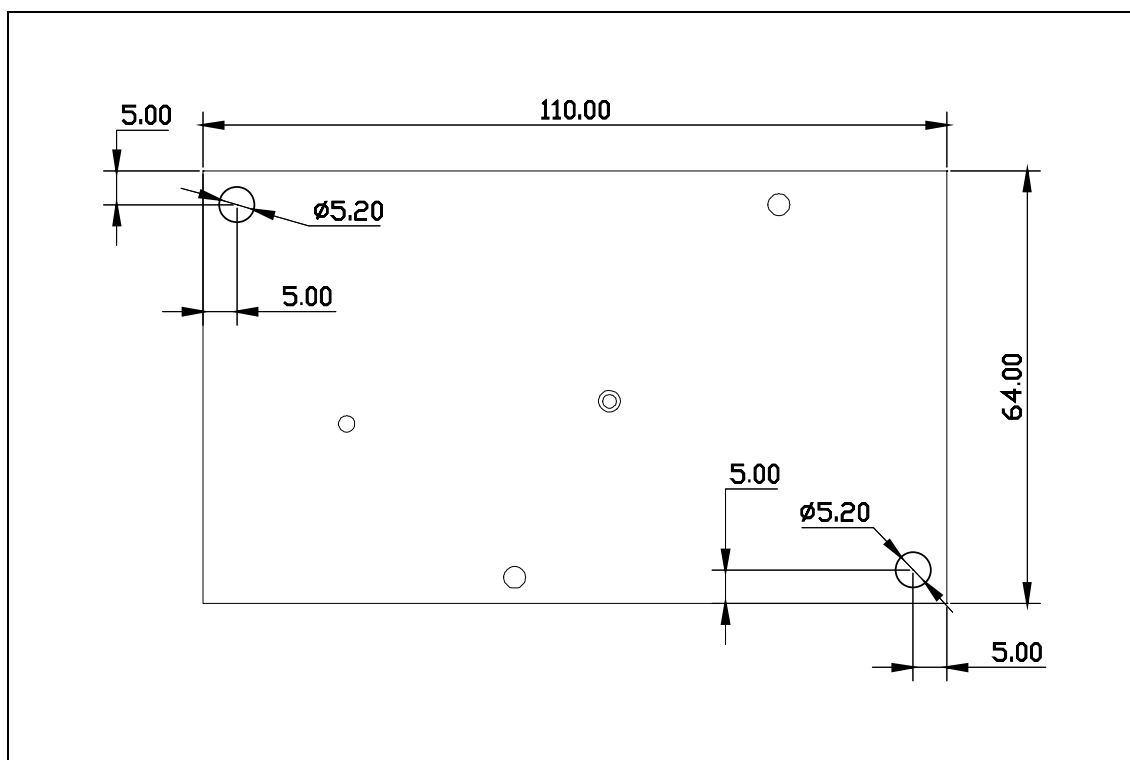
Heatsink plate for MS2 (upper view). The thickness of the plate is 6.0 mm (0.24 in).
